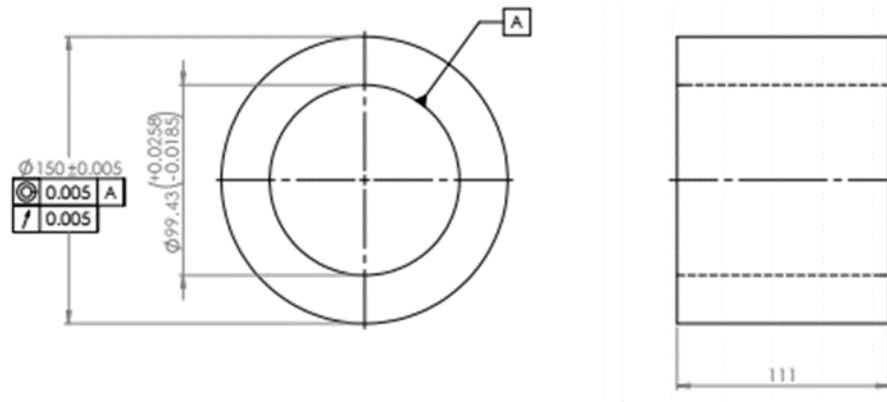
Smooth seal rotor shrunk onto shaft drawings with units of mm.
